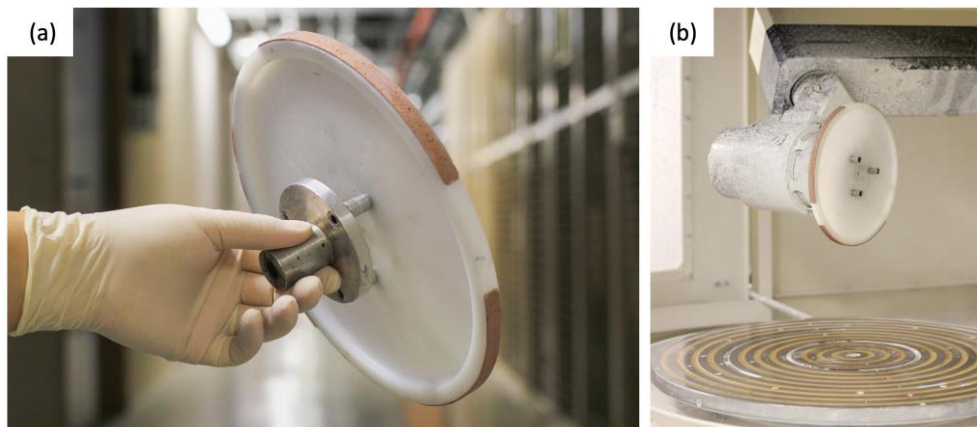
(a) Disc tool used for the initial RBF trials. (b) The disc tool mounted on the IRP600 CNC spindle.
